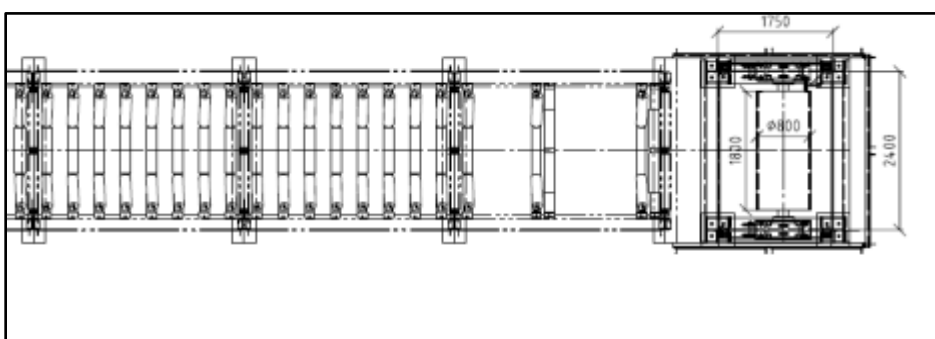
Plan view of Existing Reclaim Conveyor Showing Tail End
